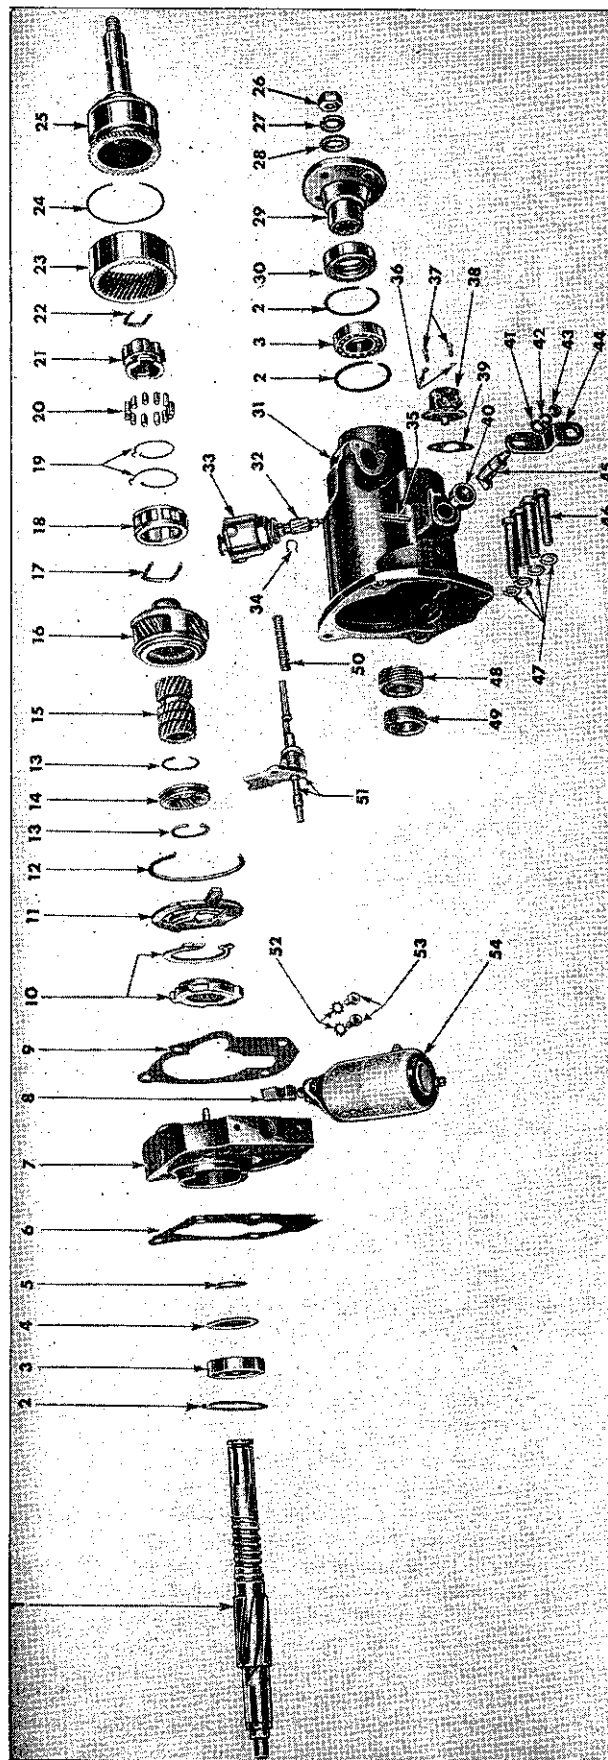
TRANSMISSION OVERDRIVE—EXPLODED VIEW
